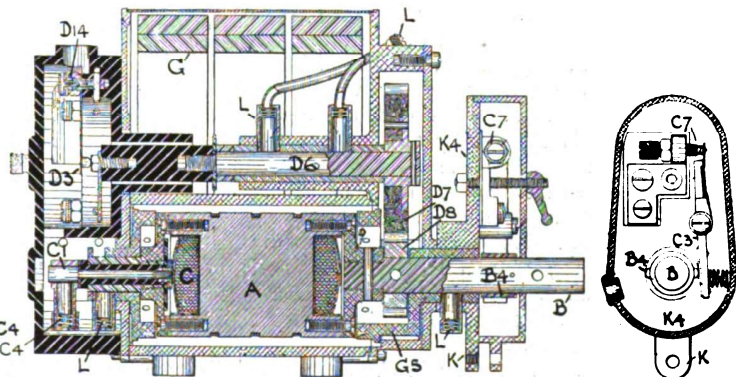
The Remy System.—Sectional drawing showing the internal construction of the magneto, and illustrating the arrangement of the low-tension contact-breaker, which is mounted as a separate unit on the opposite end of the machine to that at which the low-tension brush-gear is situated.
